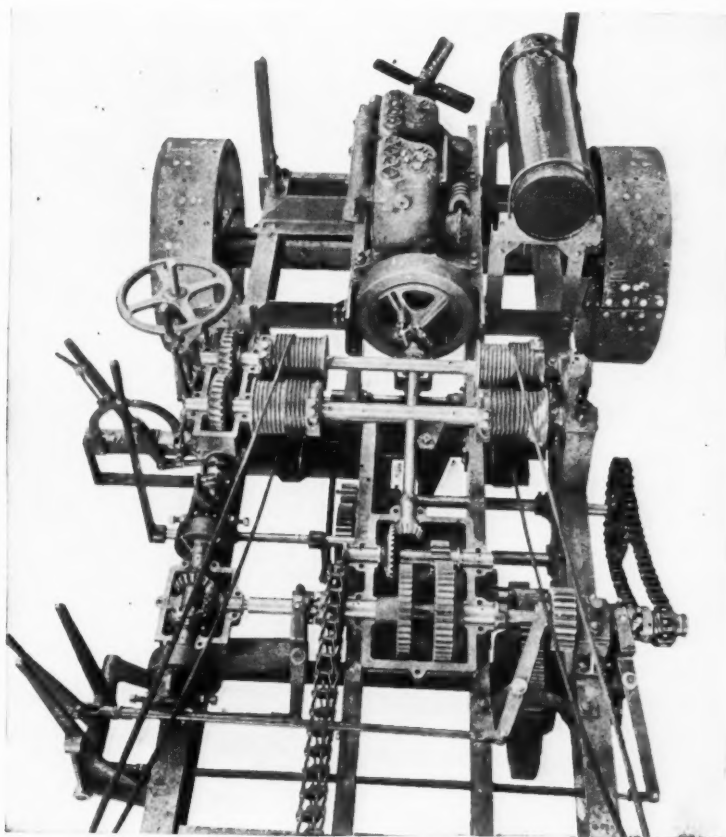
General Arrangement of Machinery on a Wheel Type Trenching Machine showing clearly the parts requiring lubrication, and their relation to each other.
